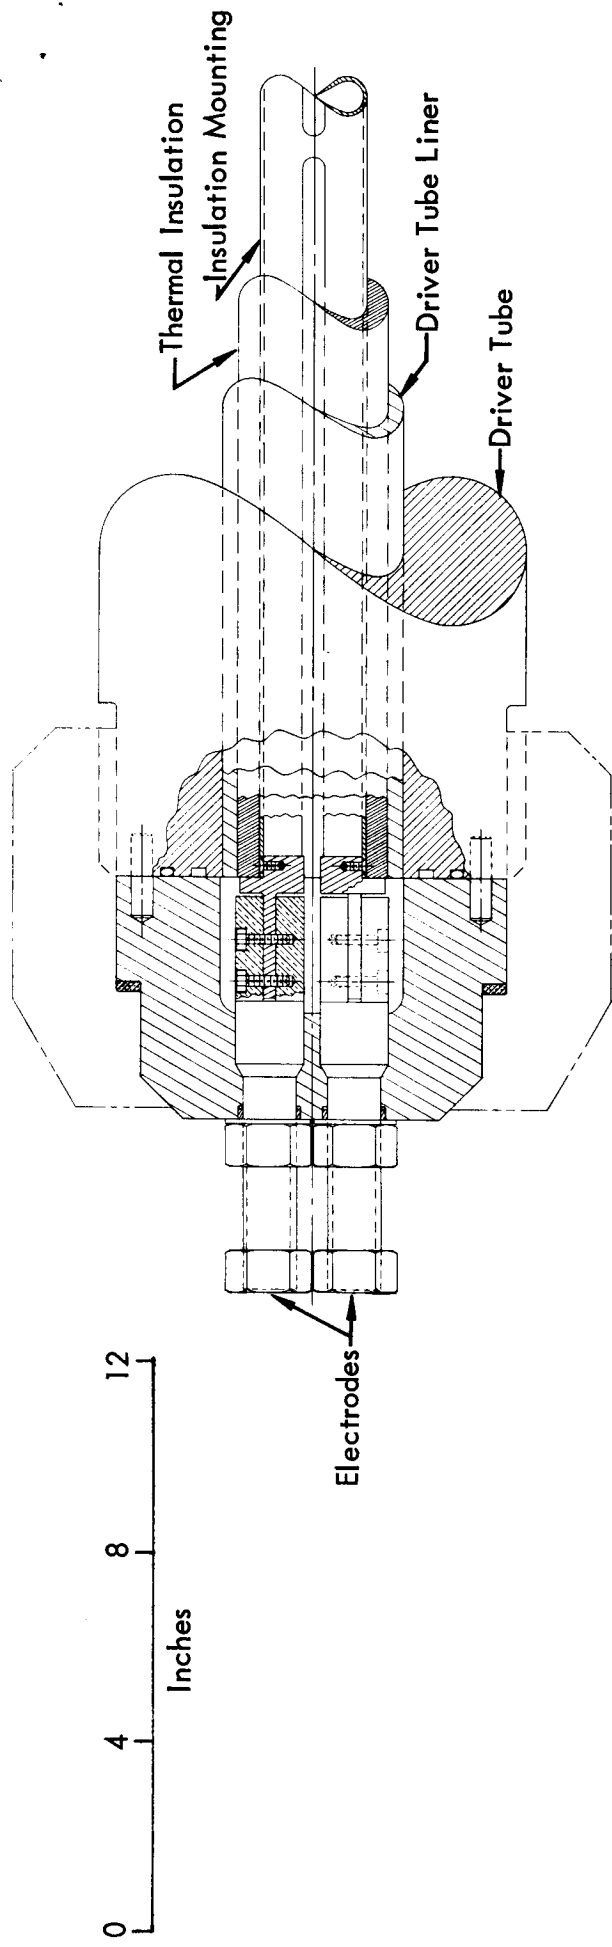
Driver Section End Cap Assembly with Thermal Insulation and Mountings
